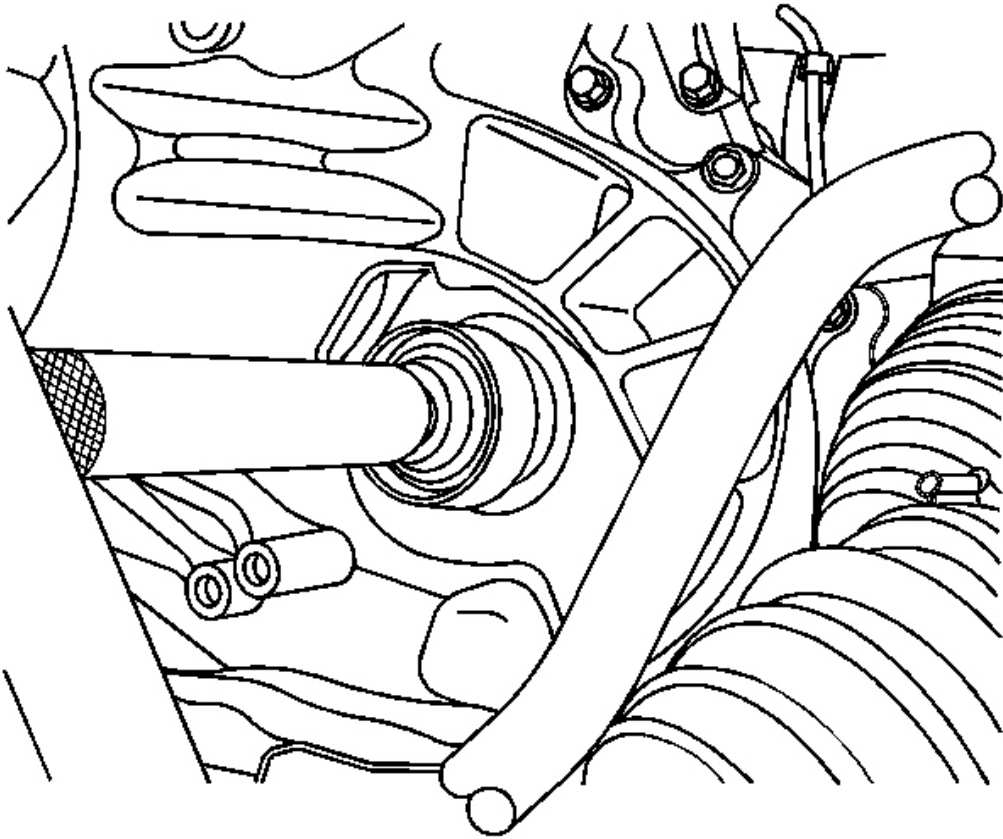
Transmission Output Shaft Oil Seal & Transmission Case
